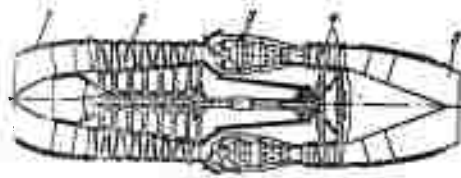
Layout of a turbojet engine with an axial-flow compressor.
